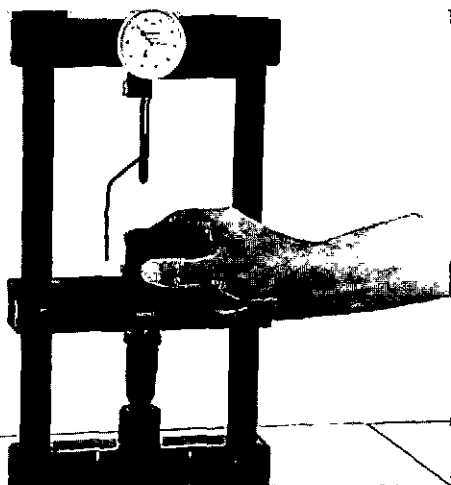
, (F60228). Install the injector into the 3375160 Setting Fixture
